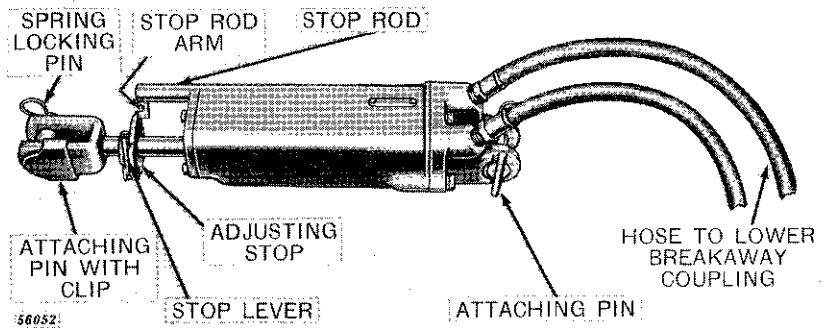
Remote Cylinder Attaching and Adjusting Parts
